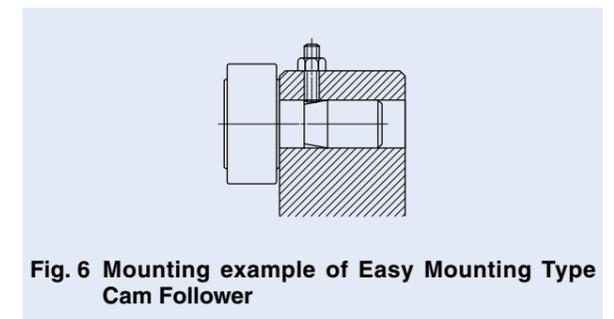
Mounting example of Easy Mounting Type Cam Follower
